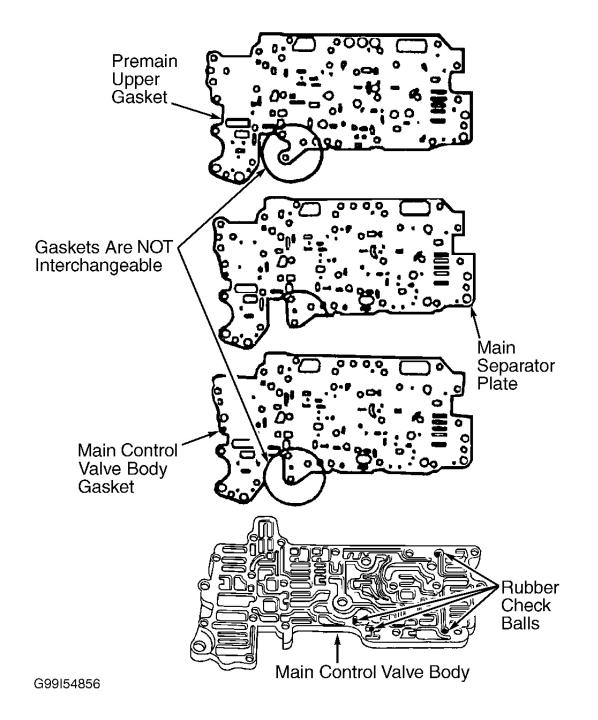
Identifying Upper Valve Body Filter, Gaskets & Separator Plate Courtesy of FORD MOTOR CO.
